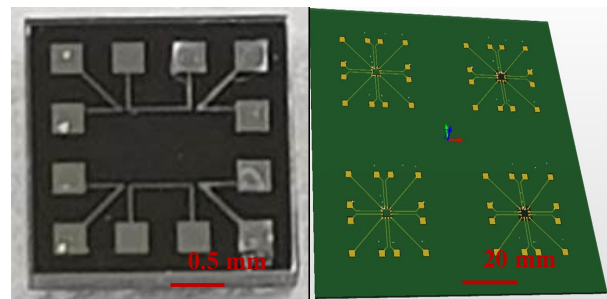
Top view for the test die (left) and top angle view for the test PCB (right).
